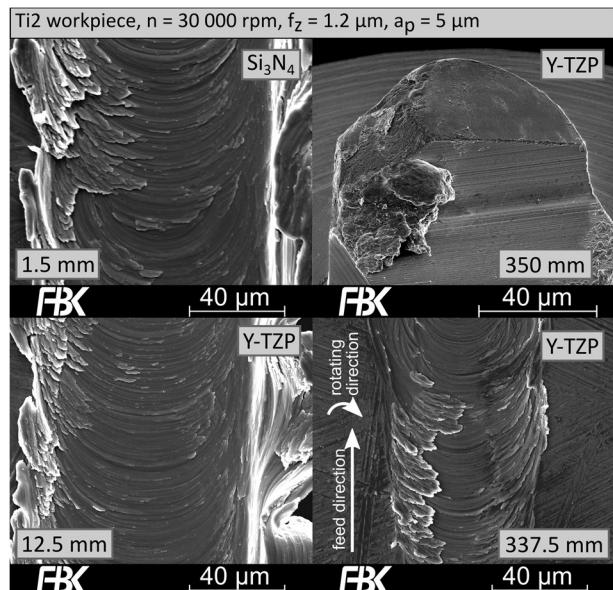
Slots and micro end mill after milling trials in Ti2: Slot milled with silicon nitride tool before tool failure (top left), slots milled with Y-TZP tool (bottom), and Y-TZP tool (top right).
